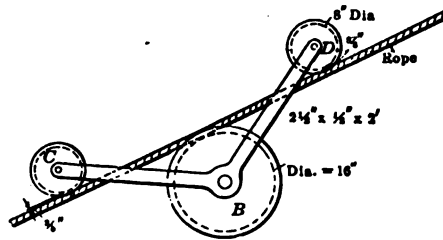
IDLER WHEELS FOR HOISTING ROPES.
